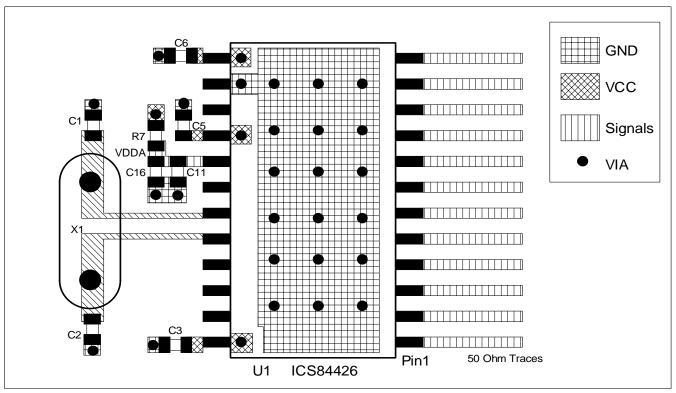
B. PCB BOARD LAYOUT FOR ICS84426
